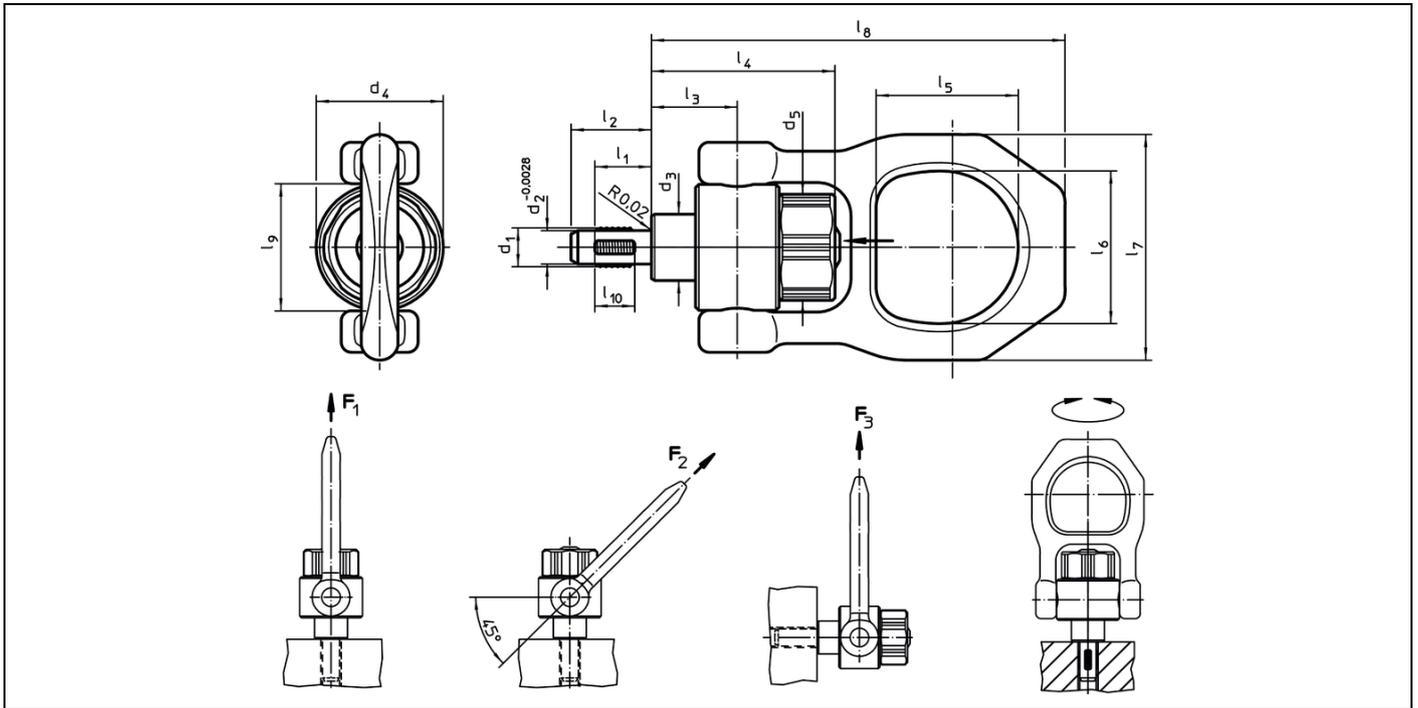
Dimensioned drawing - threaded lifting pins, self-locking, with rotatable shackle - EH 2B353
